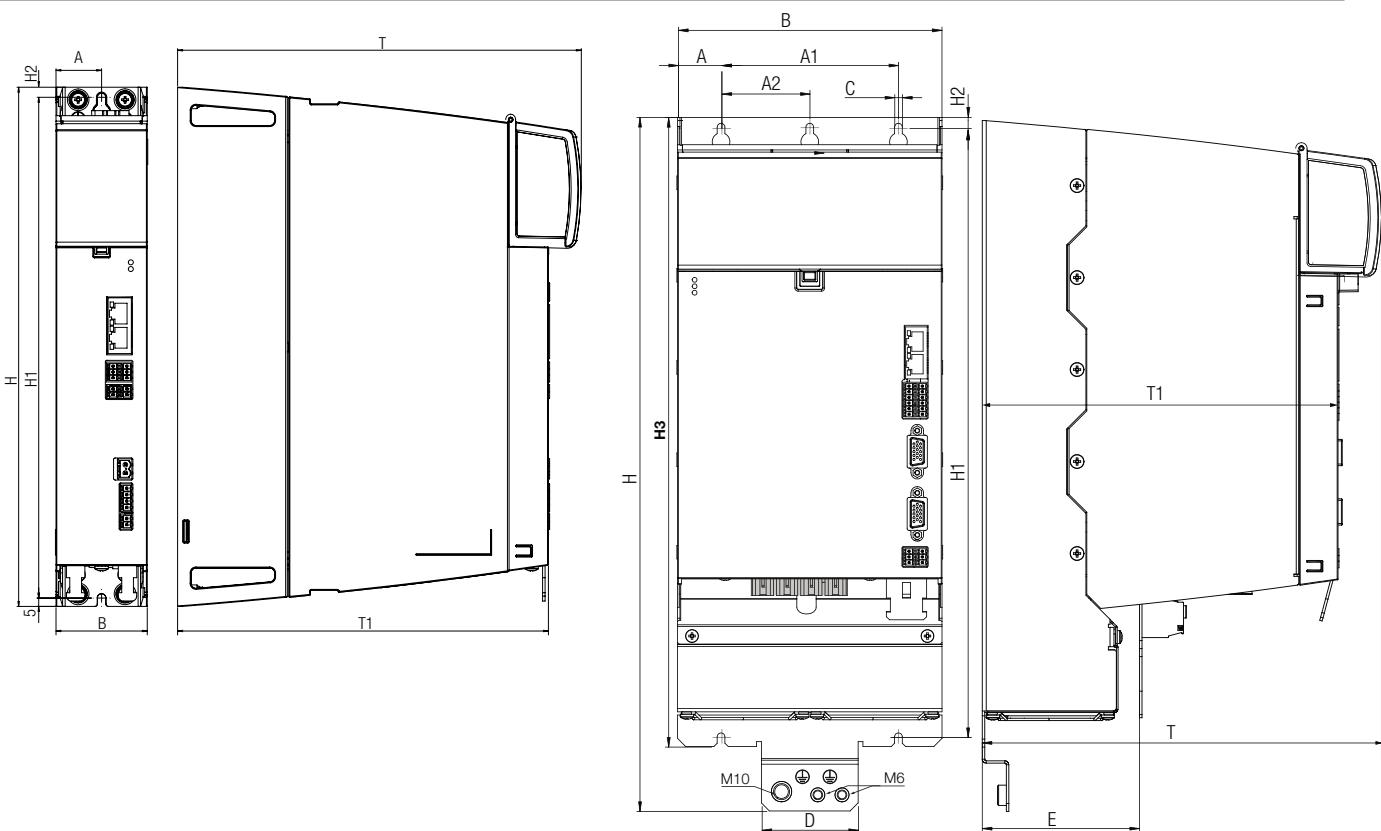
Dimensional sketches, KeDrive D3-DL 300 charging module
